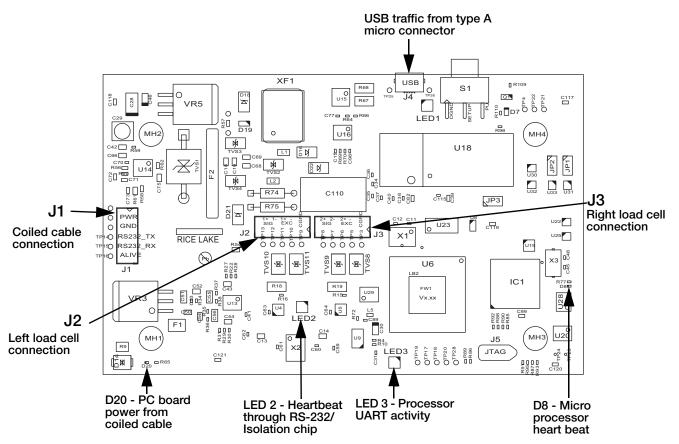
Troubleshooting iQube2 PCB Assembly LEDs (PN 162508)
